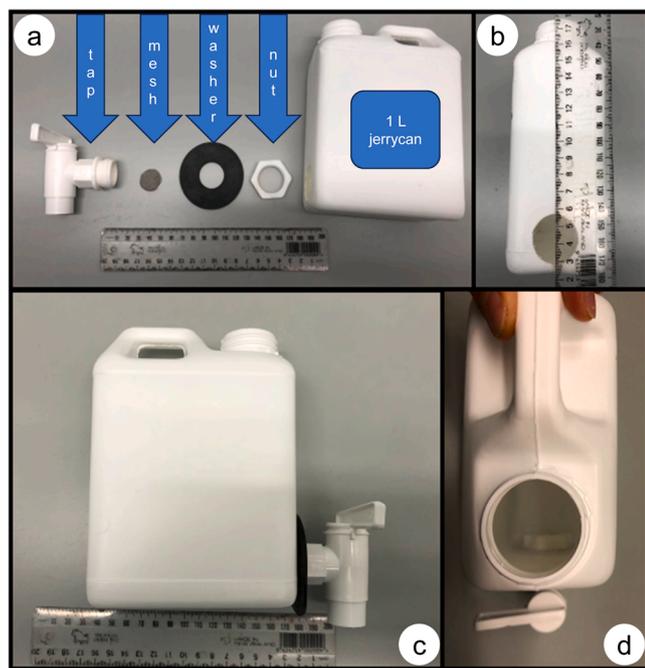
Prototype assembly of 1 litre jerrycan with 1 kg of sand. A) parts disassembled; B) location and size of hand-made hole for tap; C) jerrycan assembled (side view); D) jerrycan assembled with no sand (top view). Outer measurements of the jerrycan are 123 mm deep x 67 mm wide x 168 mm high.
